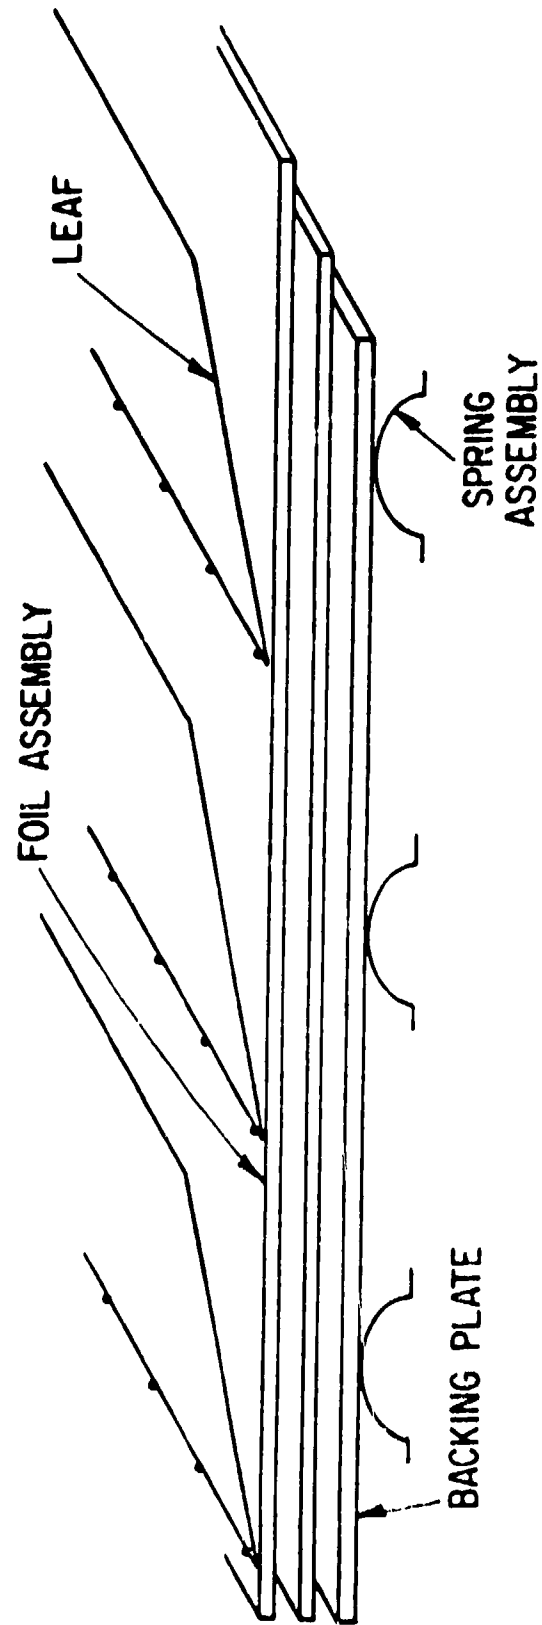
Schematic of One-Dimensional Leaf Thrust Bearing
